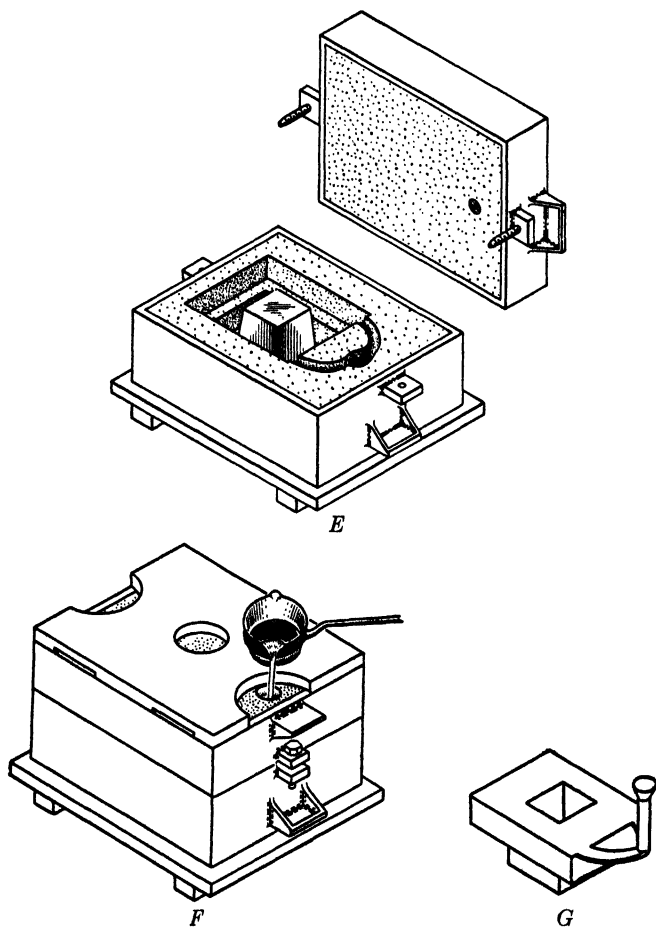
E.* The cope is drawn, the pattern is swabbed, rapped, and drawn, and the gate is cut. *F.* After the mold is closed, a weight is placed on top, and the mold is poured. *G.* When the casting solidifies, the mold is destroyed and the casting is removed.
